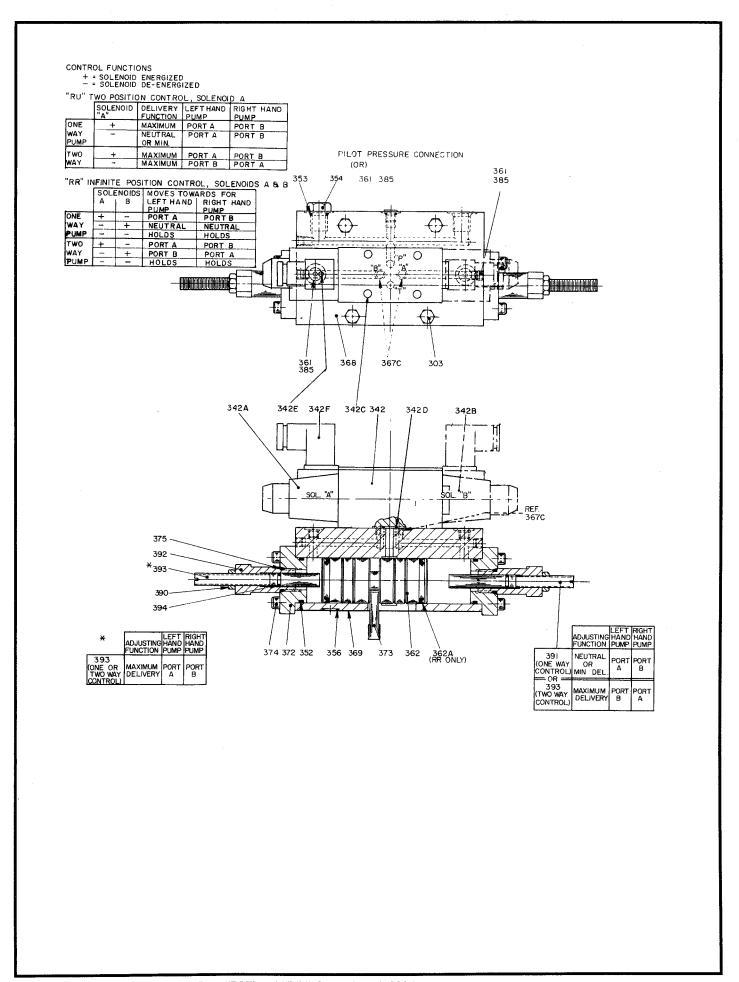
Parts Drawing, Oilgear Type "RU" and "RR" Controls. (510334)
